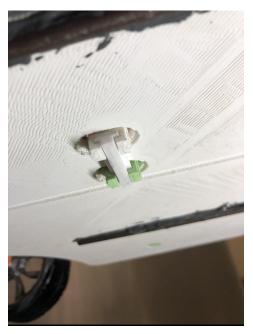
Snap and Slide-Fit Feature on Gearbox to Chassis
